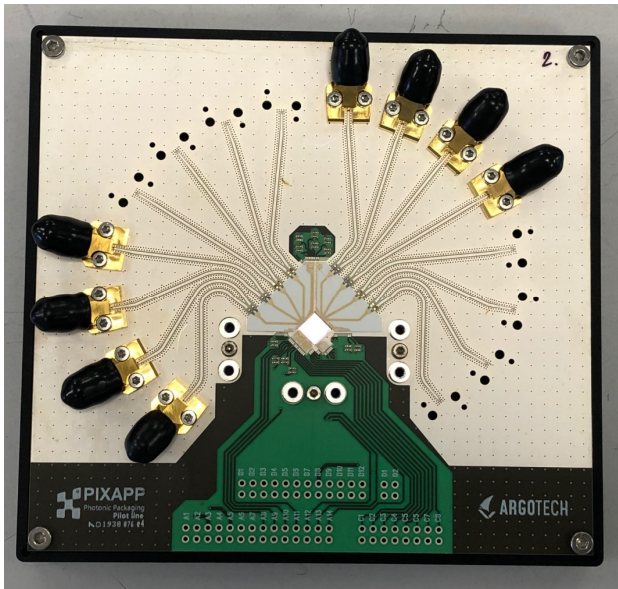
Datacom Demonstrator's housing with several Rosenberger connectors being attached to the PCB, that is connected to the LTCC interposer close to the central opening where the PIC comes in. This PCB-LTCC assembly was assembled together, and the PIC was placed in the centre once assembled PIC (passing through strands 1-3) was ready.
